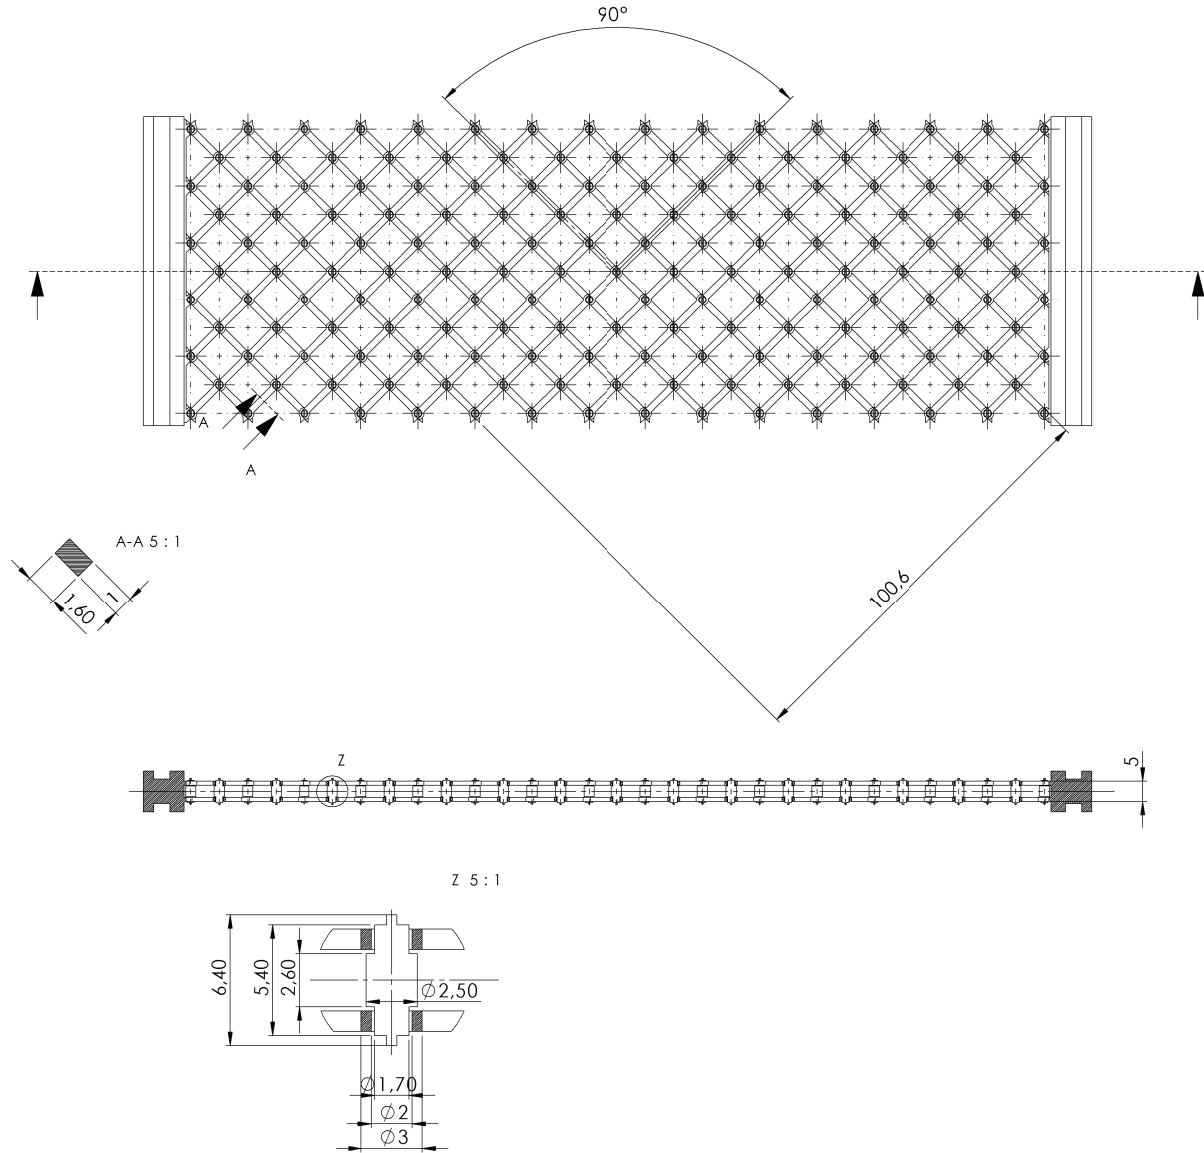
Technical drawing with the geometry of the pantographic sheet and the detail of the designed pivot, dimensions are expressed in mm (courtesy of M. Golaszewski).
